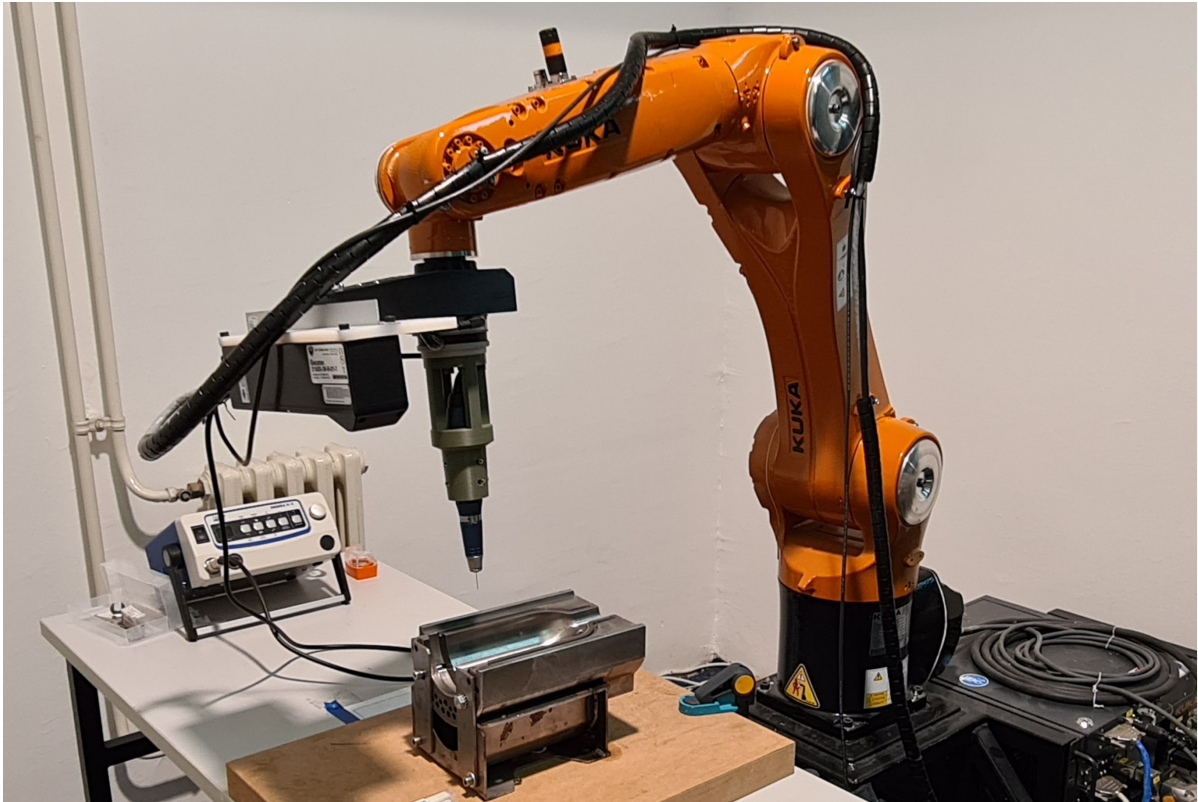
Experimental setup for deep-micro-hole robotic drilling using an industrial manipulator Kuka KR10.
